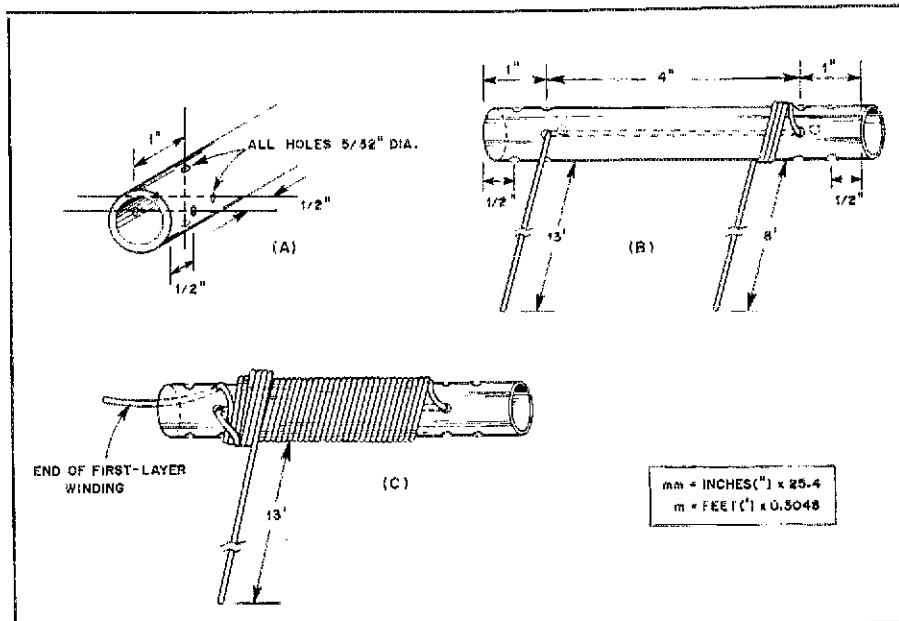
Construction details for a 40/15-meter trap. All text instructions follow this orientation of the coil form. Holes should be drilled as shown in A. First-layer coil winding is shown in B, and second-layer details in C.
